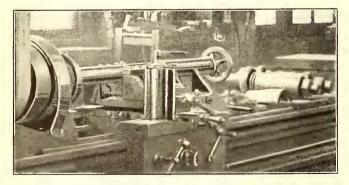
BORING BAR AND MANDRELS FOR USE IN FINISHING BEARINGS
